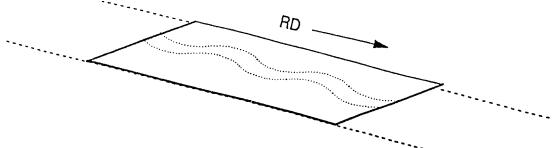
5 Ridge Buckle, Quarter Buckle, Center Buckle
